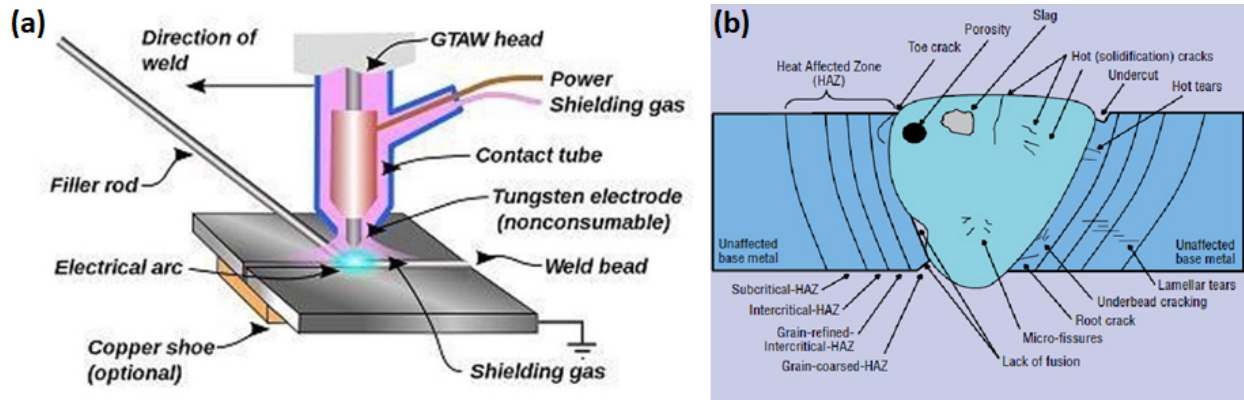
Schematics of (a) TIG welding process (reproduce from [6]), (b) common welding defects and different zones in welded components (reproduce from [7])
